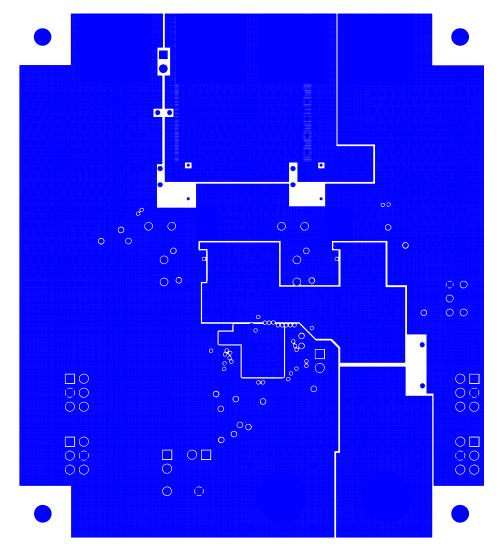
PCB - INNER LAYER 3 (TOP VIEW)
